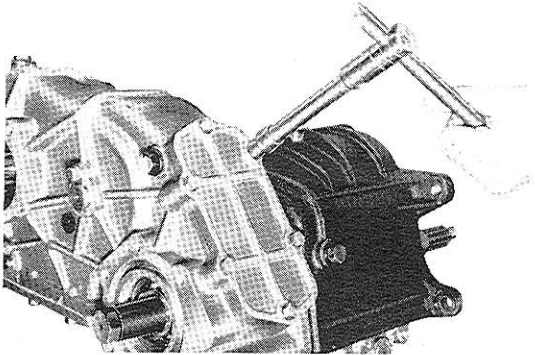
Removing Power V0434 Take-off Cover Attaching Bolts
